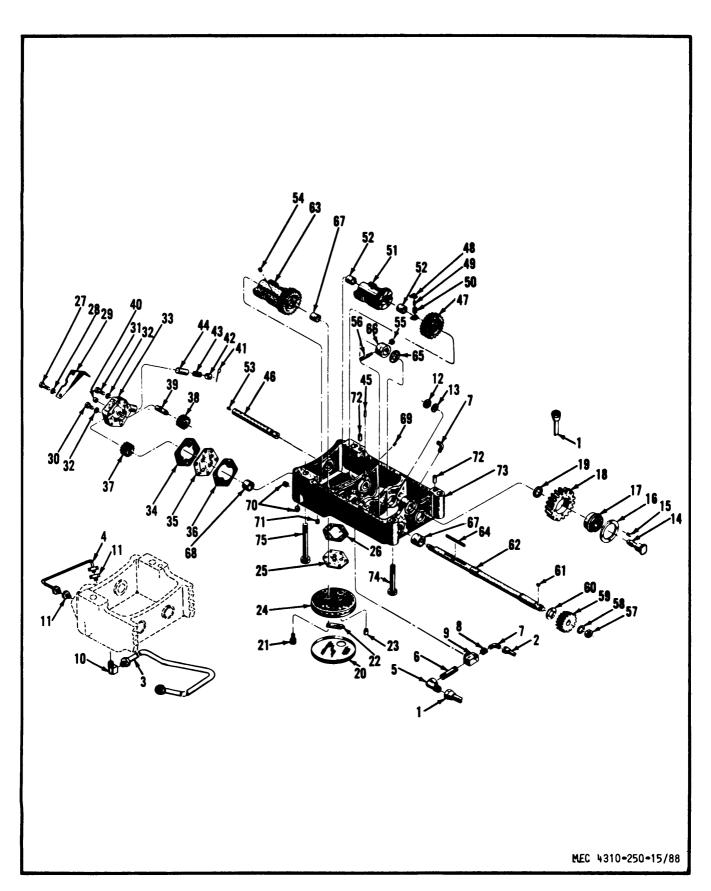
Balancer Assembly, Disassembly and Reassembly.
